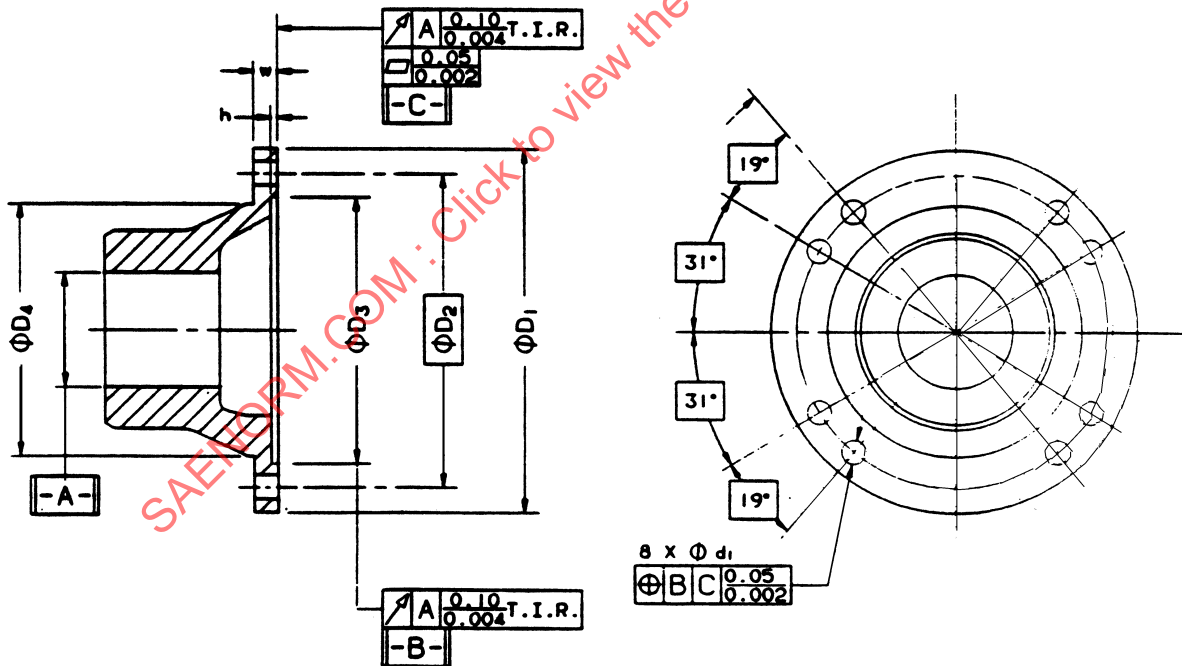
TYPE S COMPANION FLANGES—TRUE POSITION, FLATNESS AND RUNOUT TOLERANCES—mm/in
